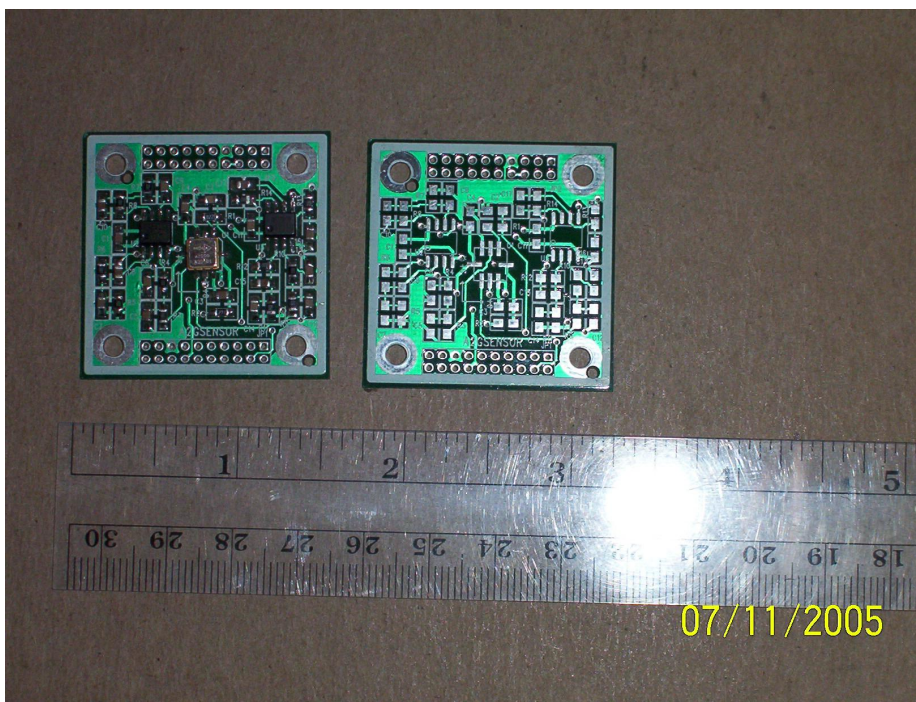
5 Photo of Actual Dual Axes Sensor Board
